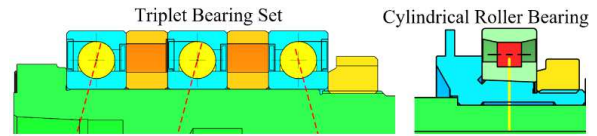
Bearing arrangements at the front and the rear of main spindle
